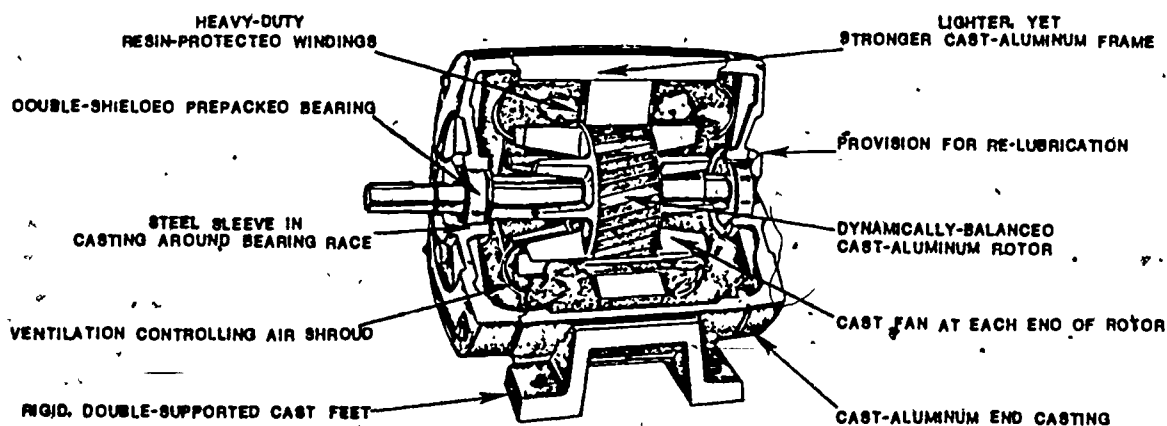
Squirrel Cage Rotor in an Induction Motor.
